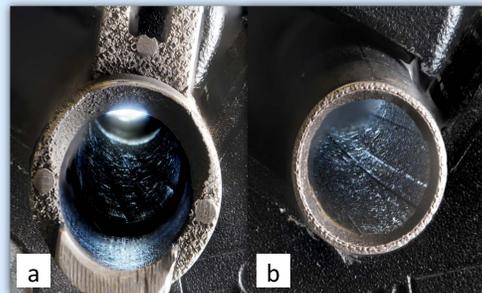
The close-up image of barrel A at the (a) chamber end and (b) the muzzle end., showing the extremely rough and granular surfaces.
